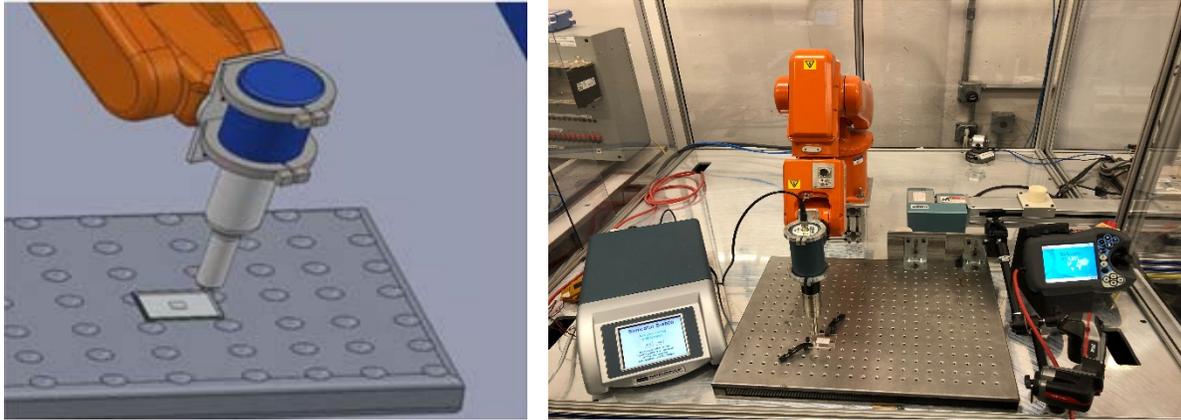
Developing virtual laboratory with robotic ultrasonic welding process
